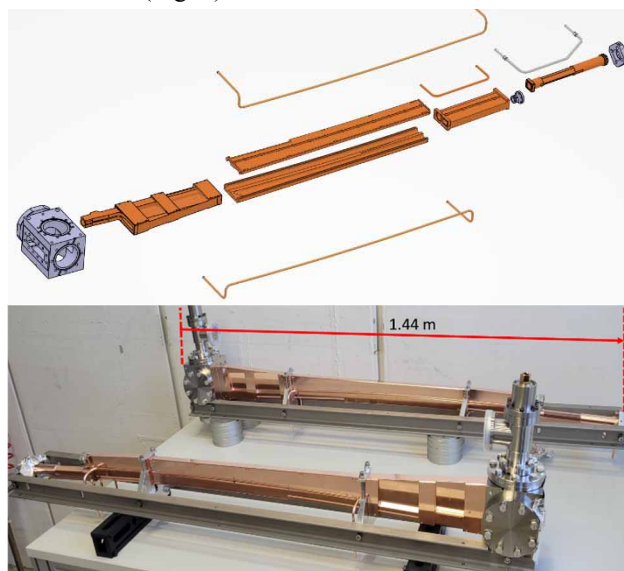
Bending magnet dipole chamber, 3D Exploded view (top) and picture (bottom).
